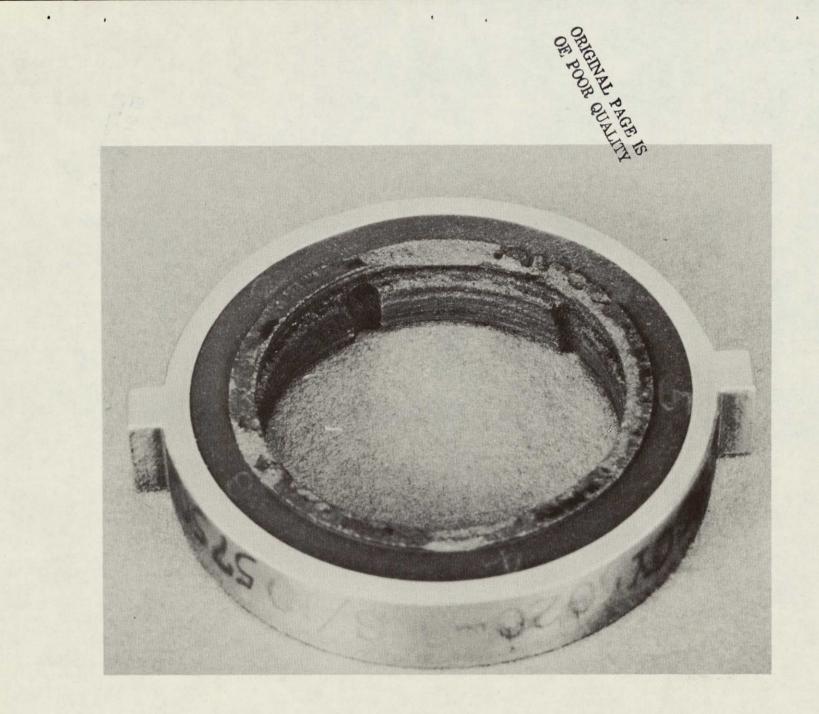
Helium Seal Turbine Side Ring (P/N RS009694X, S/N Ol, Damaged by Bearing Failure Posttest 092)
